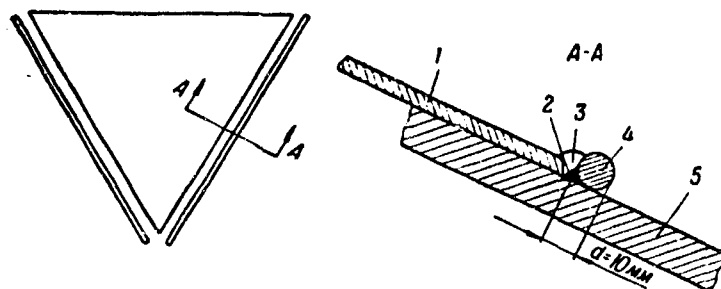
Welding Around a Patch with Auxiliary Rod: 1- patch; 2- welding seam of rod; 3- welding seam of patch; 4- steel rod; and 5- ship's planking.
